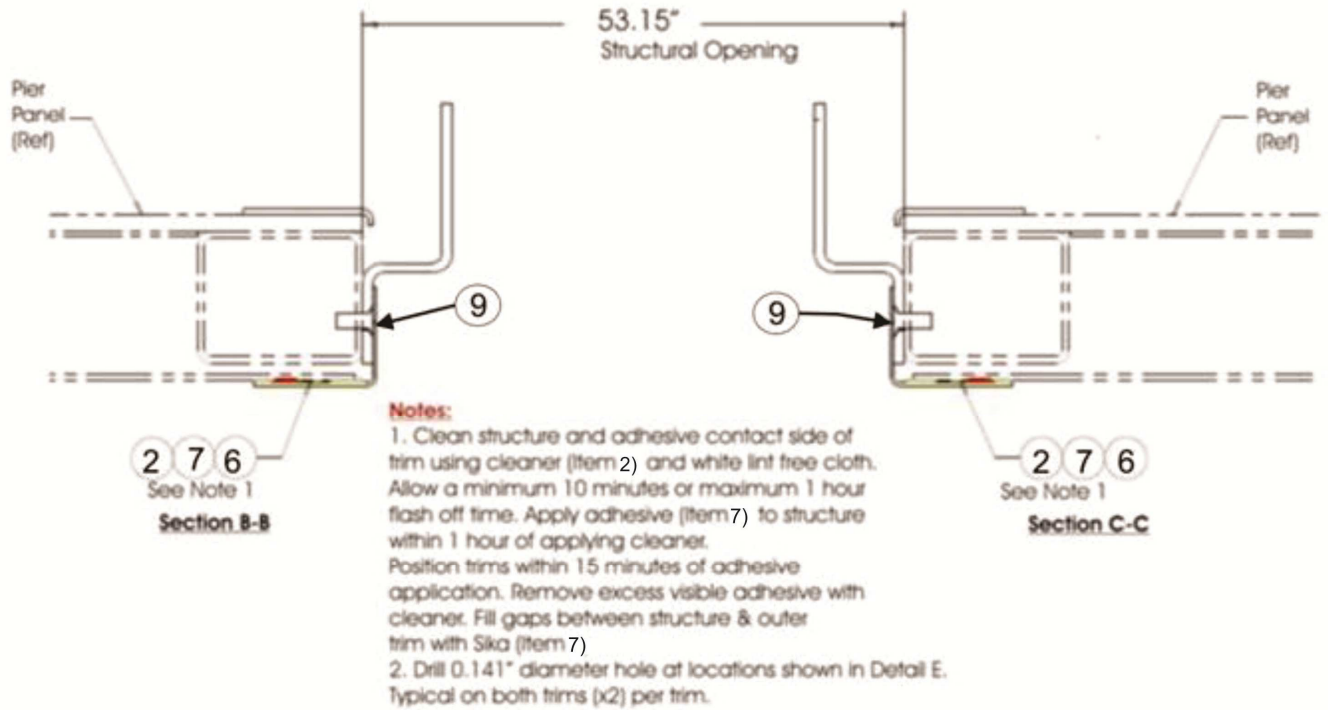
SHOWN ROOF PANEL SECTION CUT OUT. THIS IS ON A PER BUS BASIS.
